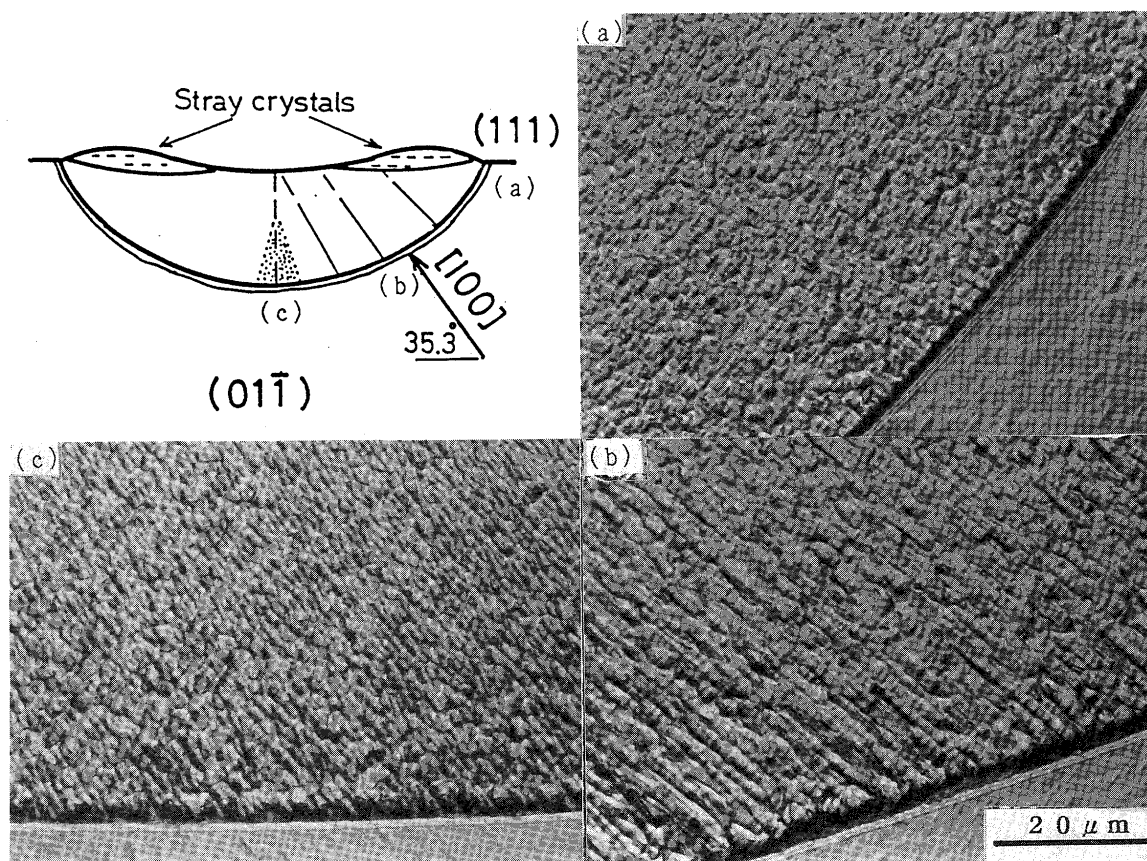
(011) cross-sectional photomicrographs of Nd: YAG laser spot welded Al-2%Cu specimen of (111) surface.
